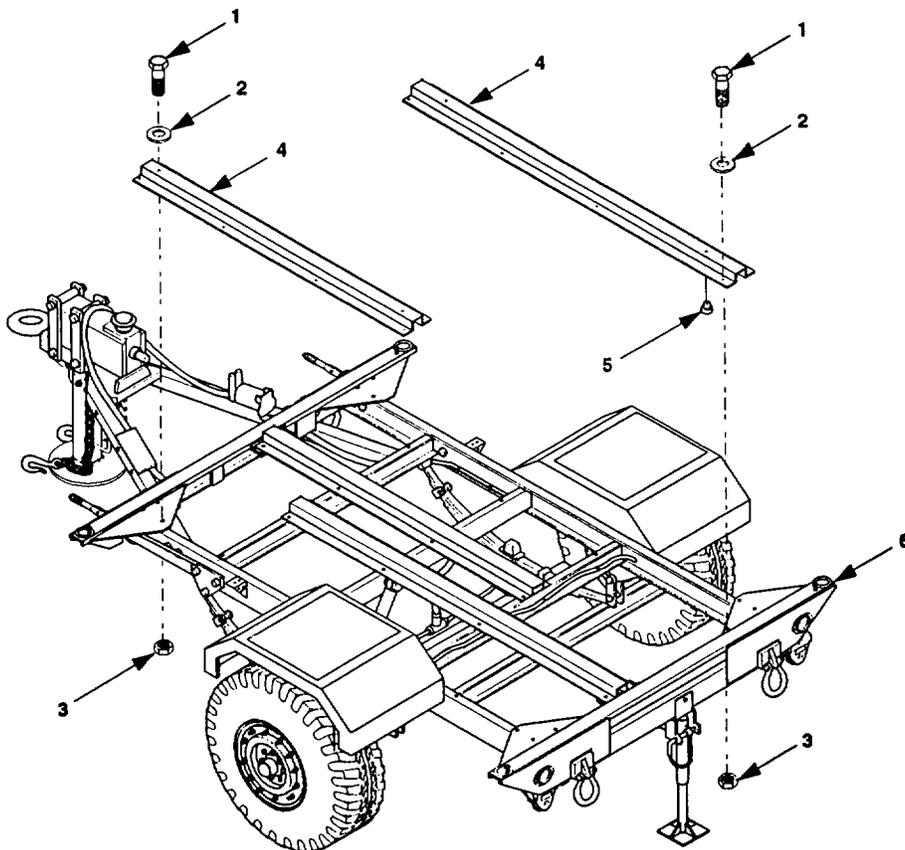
Replace AN/MIQ-35 Generator Mounting Rail.
